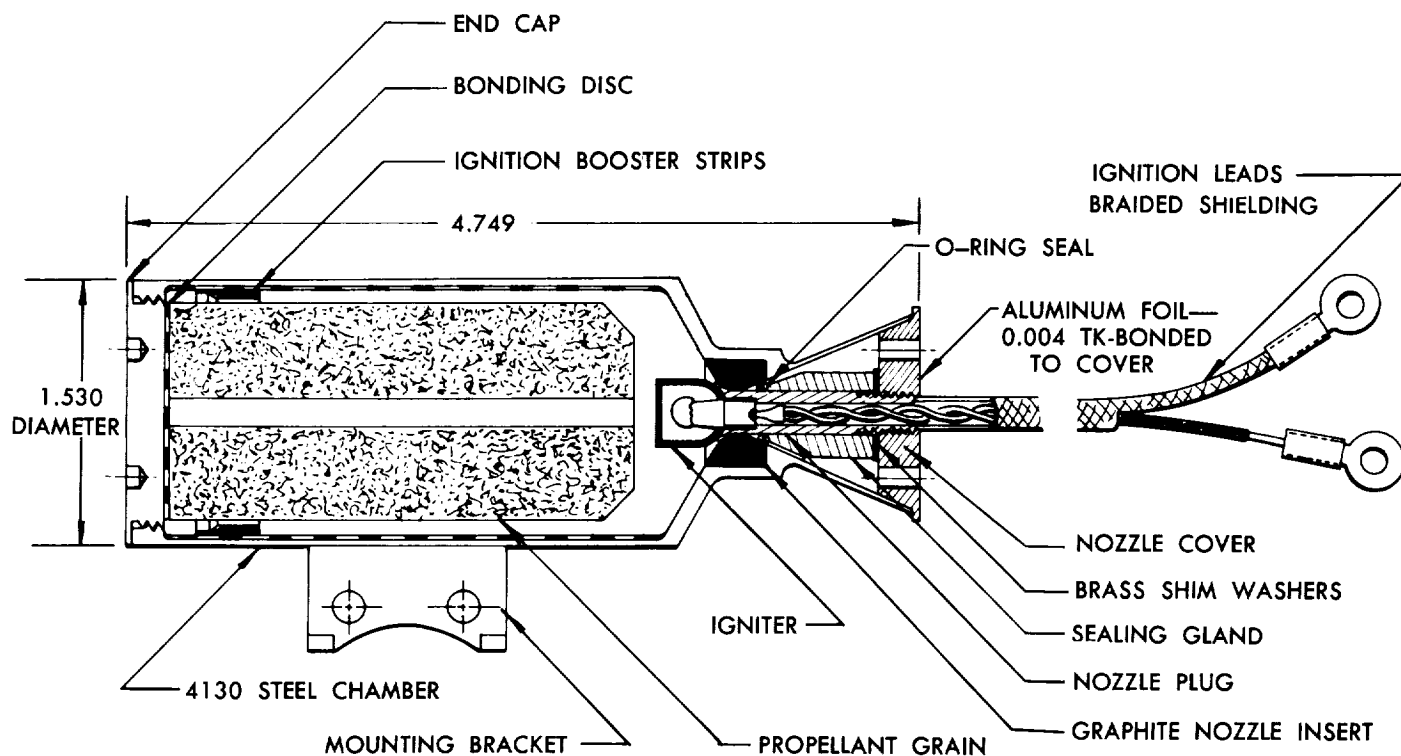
Cutaway of 1XS-50 Spin and Retro Motor
